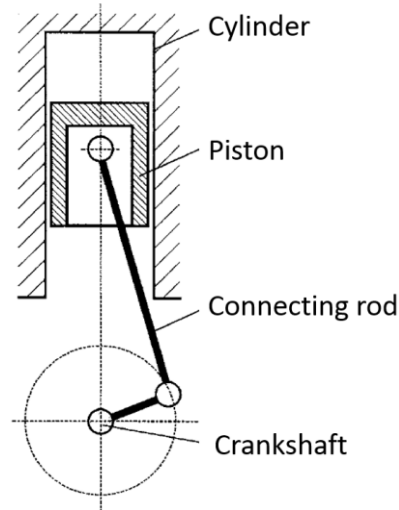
Schematic view of a reciprocating piston engine cylinder [3].
